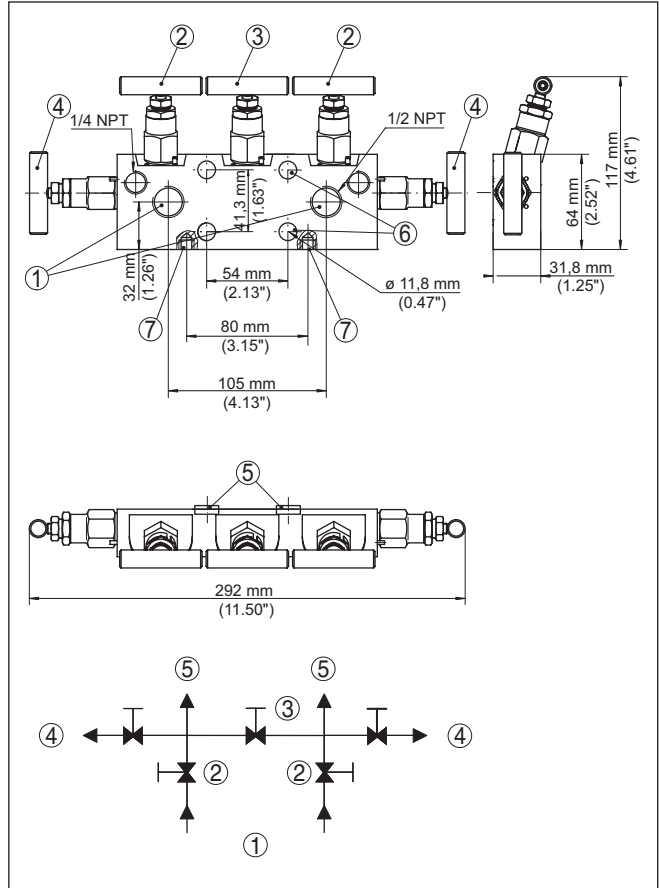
Configuration of 5-fold valve block according to EN 61518
